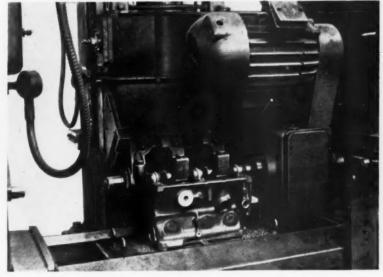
Milling the bearing oil grooves on the machine shown in Fig. 7
